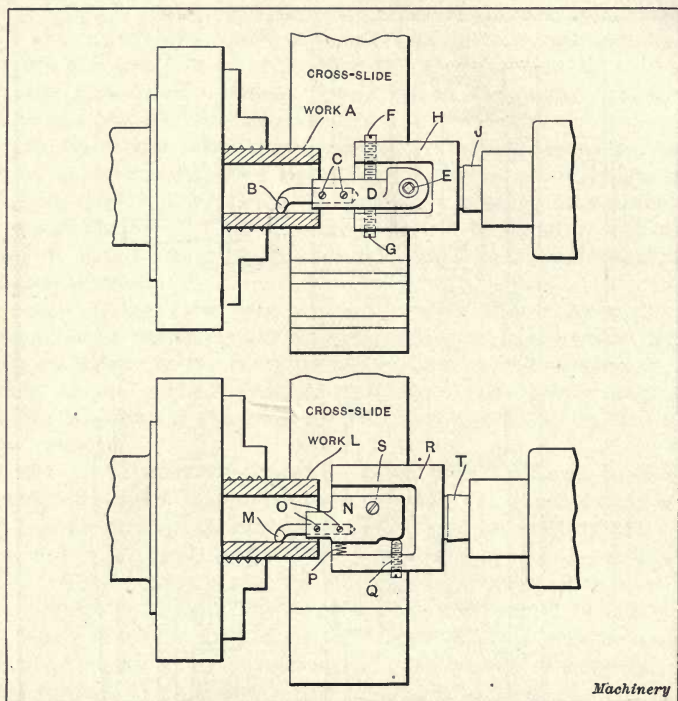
Two Types of Adjustable Boring Tools for Tool-room Work
